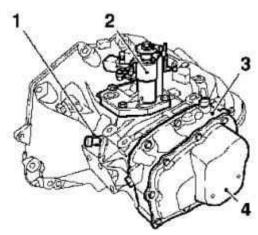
Removing the caps with gear: 1 - Reversing light switch, 2, 3, 4 - cover
